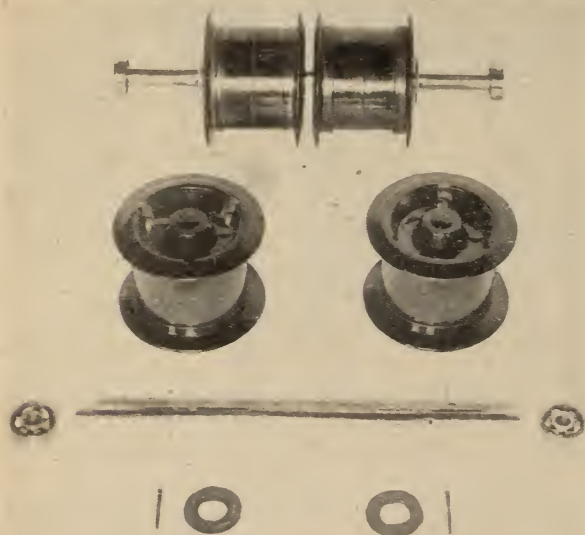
Top roller assembly. The Bakelite rollers were made by screwing together two single-sided 17.5 mm. rollers that happened to be available
